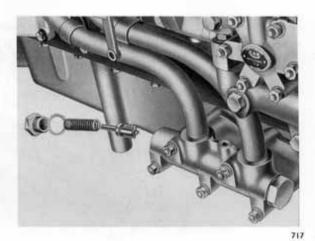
Oil pressure relief valve - semi-dry sump engine
